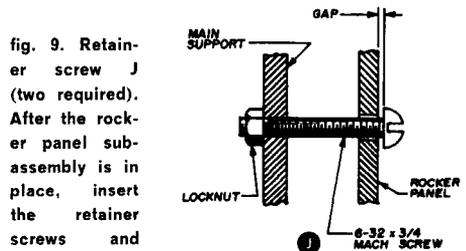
Retainer screw J (two required). After the rocker panel sub-assembly is in place, insert the retainer screws and lock with nut, permitting just enough gap to allow freedom of paddle motion.
